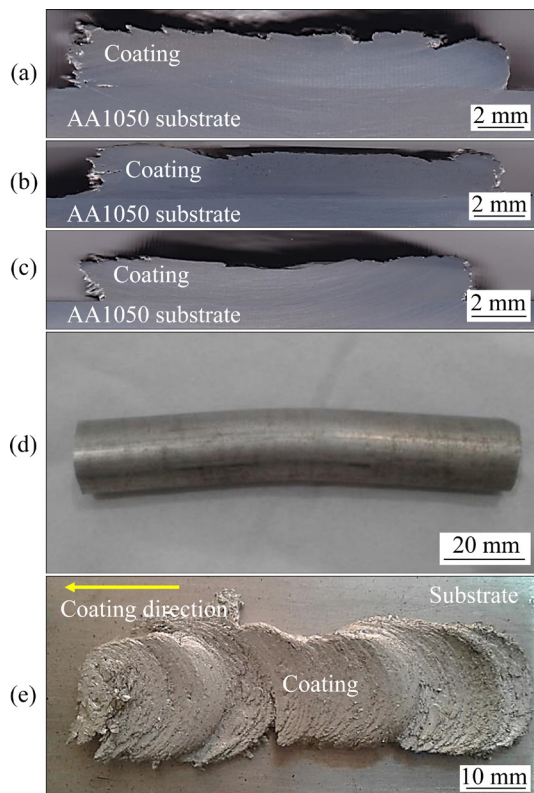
Morphologies of cross-section of composite coated samples ((a) C-600, (b) C-800, (c) C-1000), consumable rod during coating of Sample C-400 (d), and top surface of Sample C-1200 (e)
